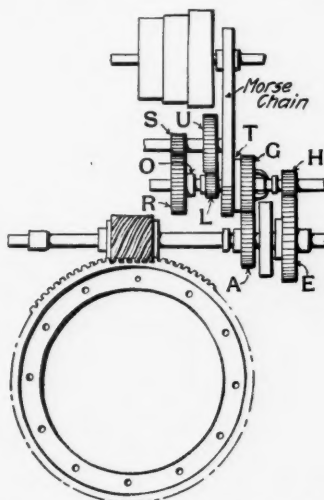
General Arrangement of Driving Mechanism on the Poole Mill.
